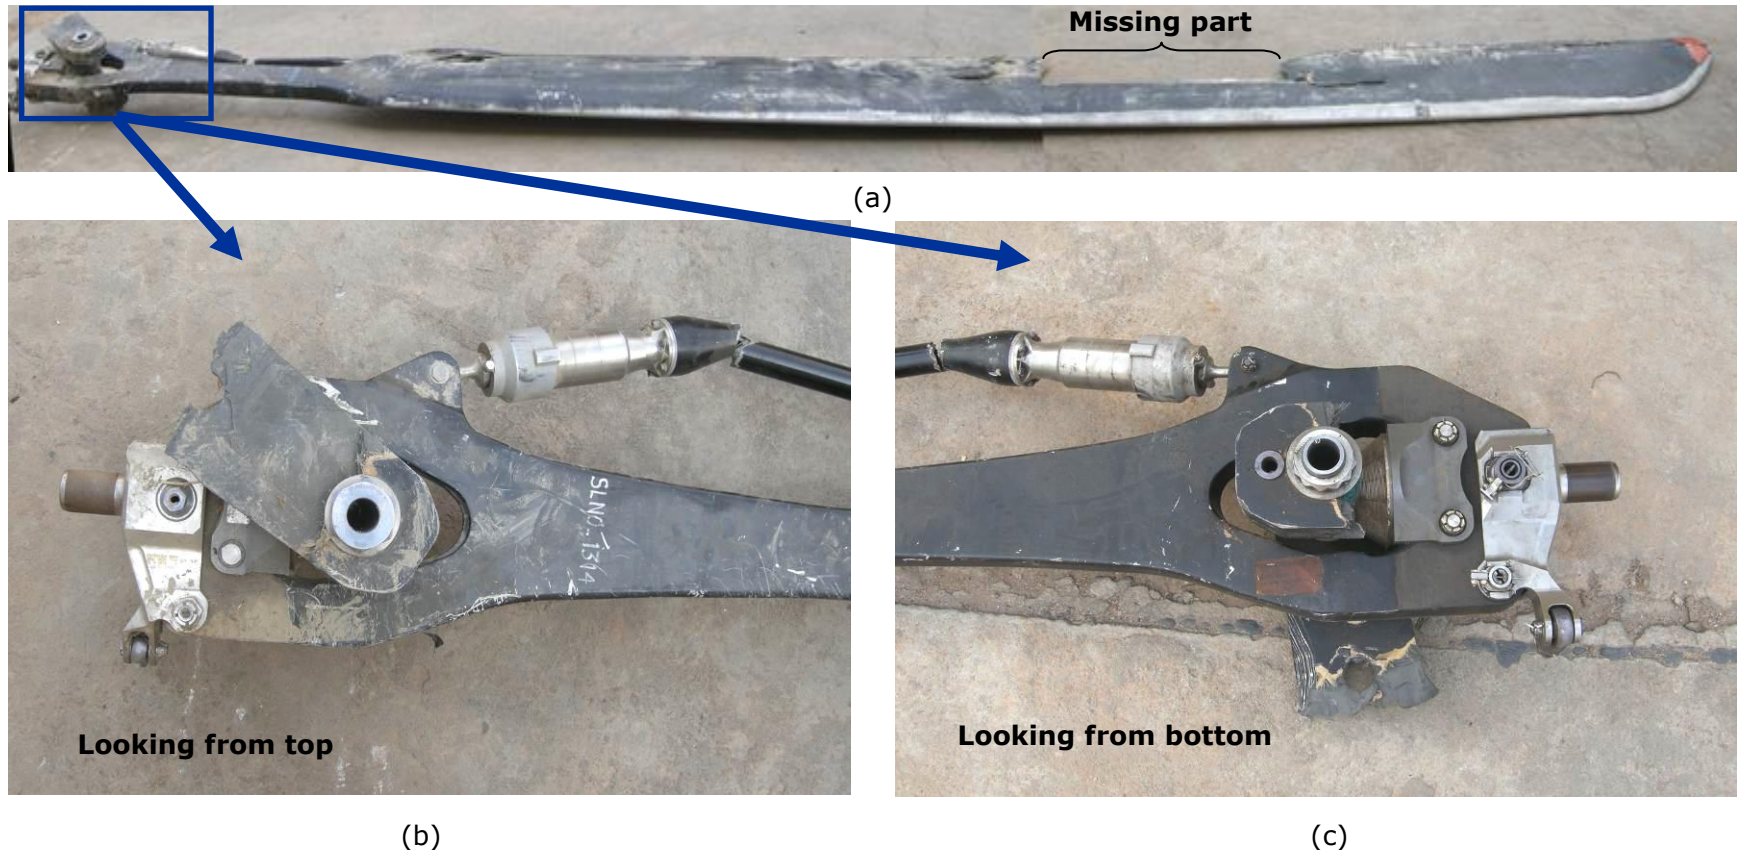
Photographs of the blue MRB showing (a) complete blade as retrieved from the wreckage, (b) failure pattern on the top hub plate, and (c) failure pattern on the bottom hub plate; note the failures of the hub plate to be identical of those shown in case of red MRB (refer Fig.1(b) and (e))
